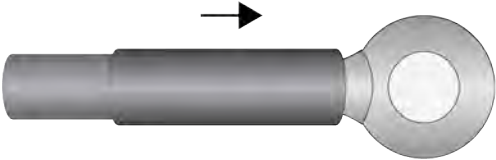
Sliding the Heat-Shrink Tube Over the Ring Terminal Lug
